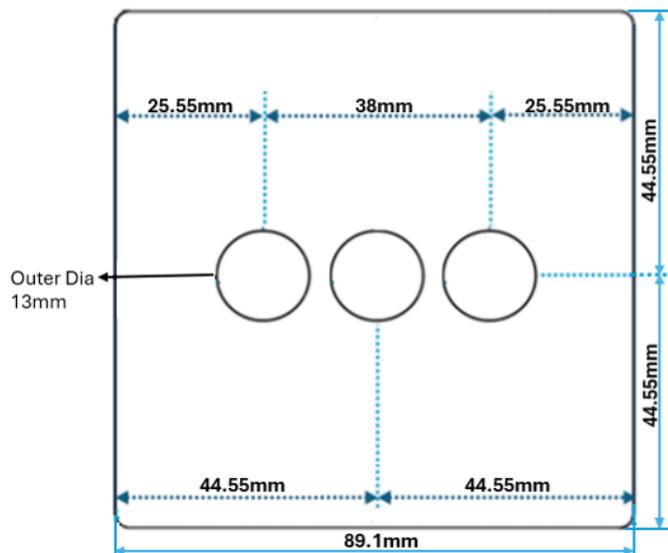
CTP40 Device (3-Button) Dimension – Front View
